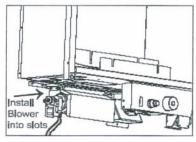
Set Blower plane and fix it onto two brackets of shell board. Please refer to Figure 9. Make sure Blower is installed into the slots.
